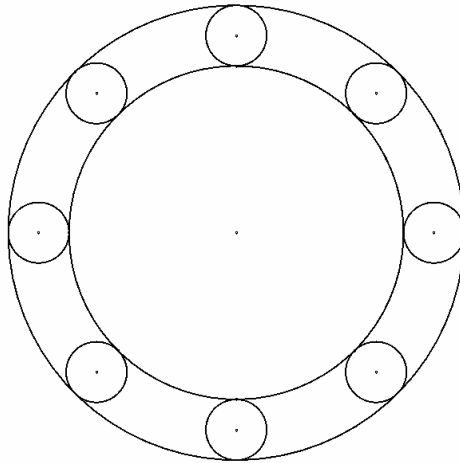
Bolt hole ring of a flange with eight bolts viewed from above.
